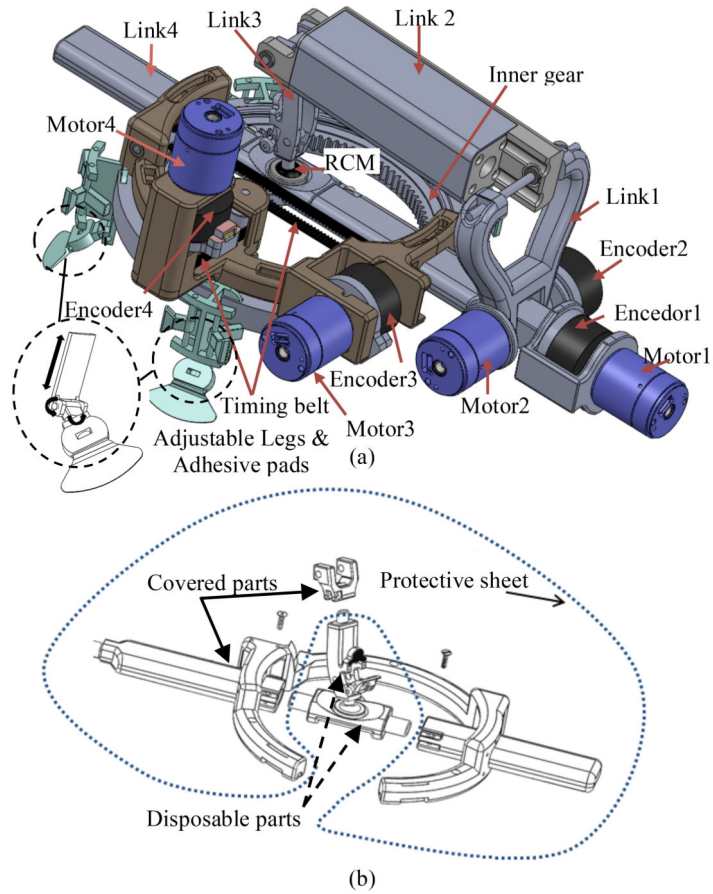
CAD model of the final design (a) patient-mounted robot (b) disposable parts and covered parts.
